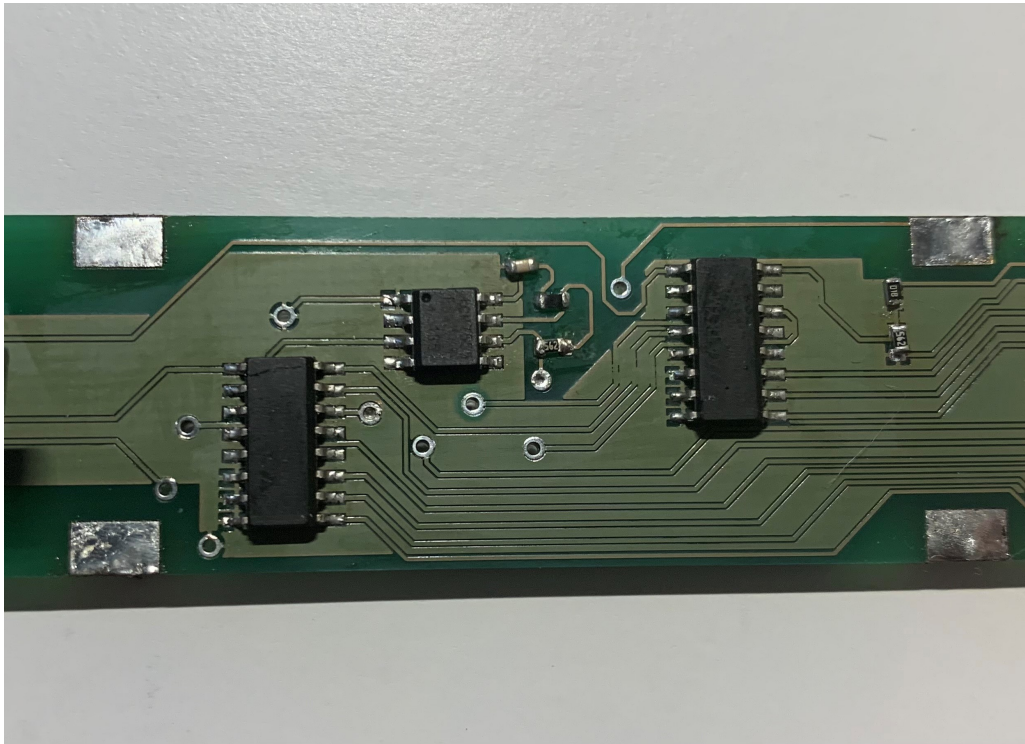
The hardware of the capacitive sensor with the components soldered onto the PCB, where the pads on the PCB can be seen in the corners of the included part of the PCB.
